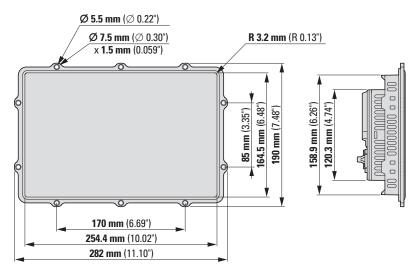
Dimensions for 10.1" rear (panel) mounting devices in mm (inches)XV-313-..-...-A11-...
